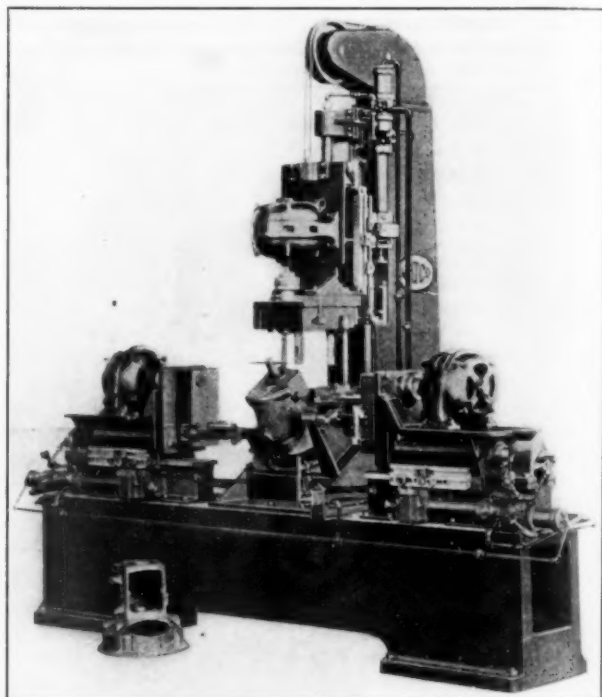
WAY MACHINE CONSTRUCTED FROM UNITS OF THE TYPE SHOWN IN FIG. 4
